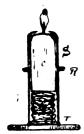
Holder for Candle of Candle Lamp. C, candle; S, socket for candle; T, spring forcing up candle inside socket; R, rim to prevent top of lamp from descending too low.
